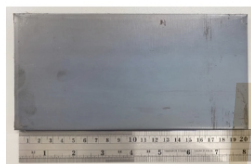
Base metal workpiece for experiment SS400 carbon steel.
